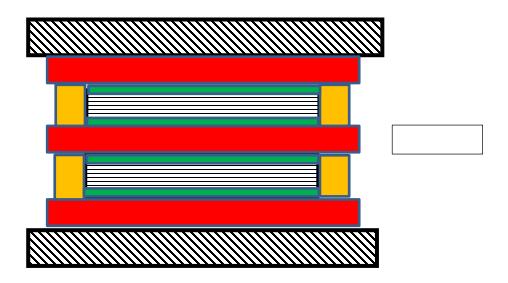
Molding Technique for Tenax®-E TPWF PEEK (Forming of TPCL)
